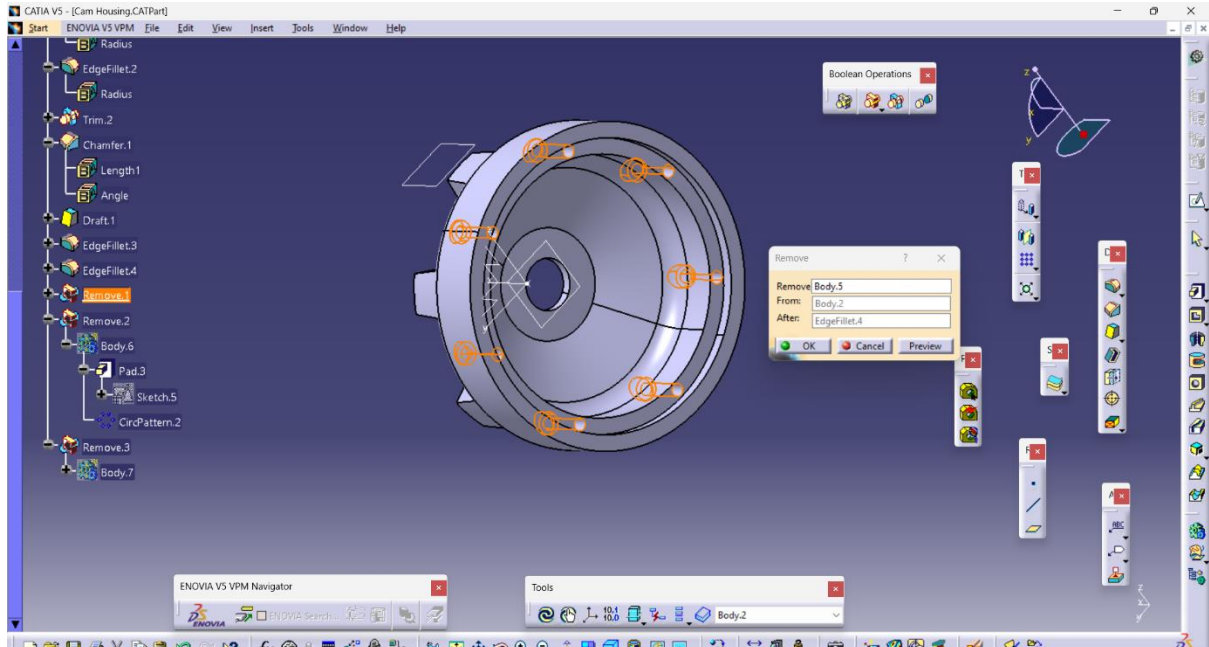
Removing Body4 from Body2 using "Remove" Boolean operation
